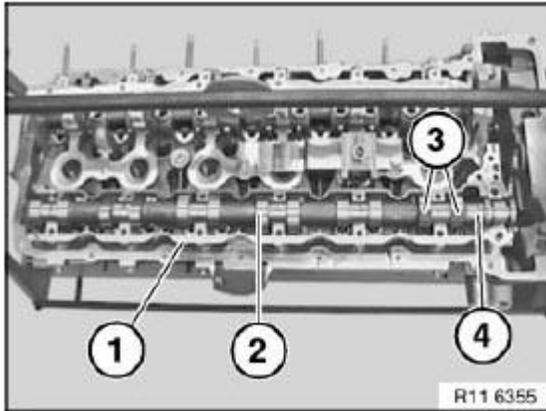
Identifying Lower Bearing Bank With Exhaust Camshaft
